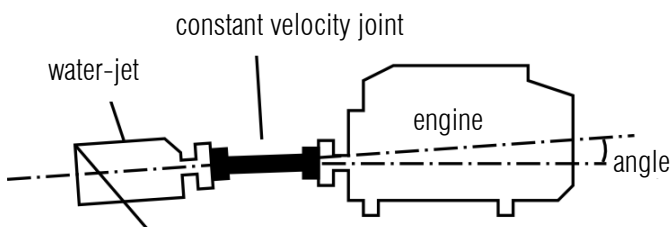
Connection between engine and water-jet propulsion unit with flange with bearing
